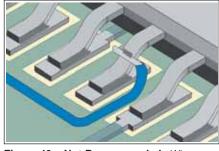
Not Recommended Wire soldered perpendicular to component lead.
